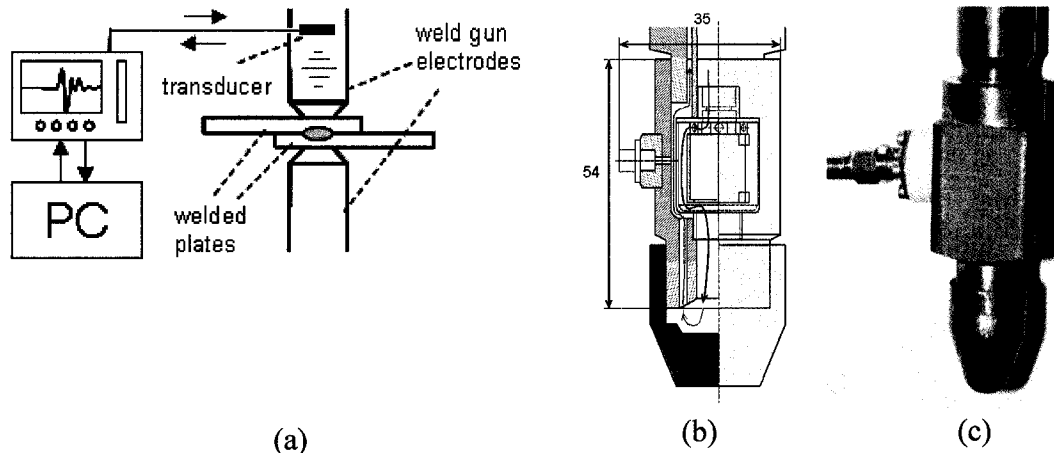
The view of the setup. (a) Schematic view of the arrangement; (b) schematic view of the transducer housing; (c) photo of the installed transducer.
